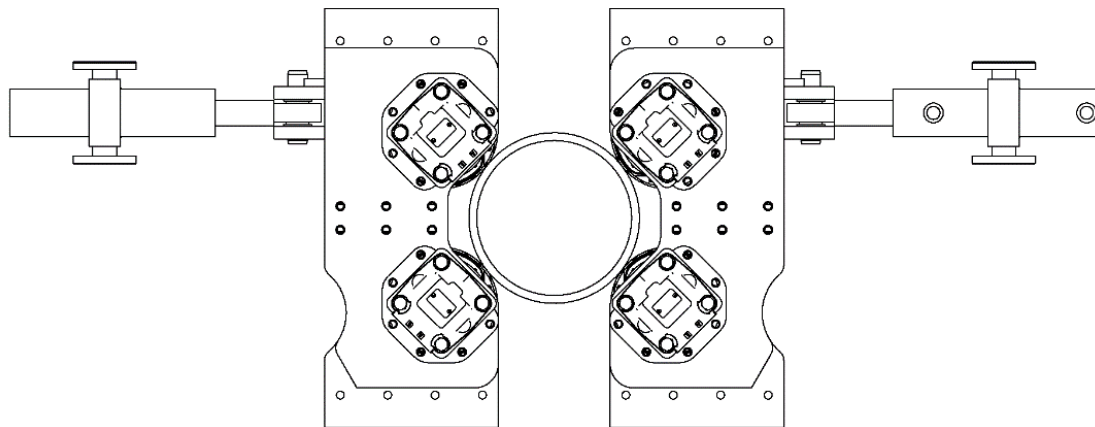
Schematic diagram of drilling tool clamping by spinning mechanism
